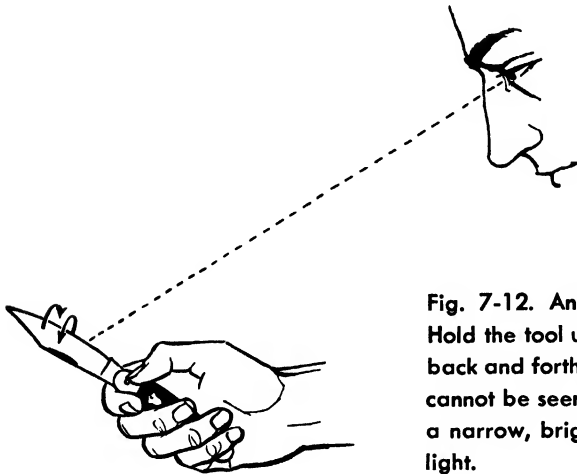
Another test for sharpness. Hold the tool up to the light and move it back and forth. The edge of a sharp tool cannot be seen. A dull edge appears as a narrow, bright, shiny line that reflects light.
